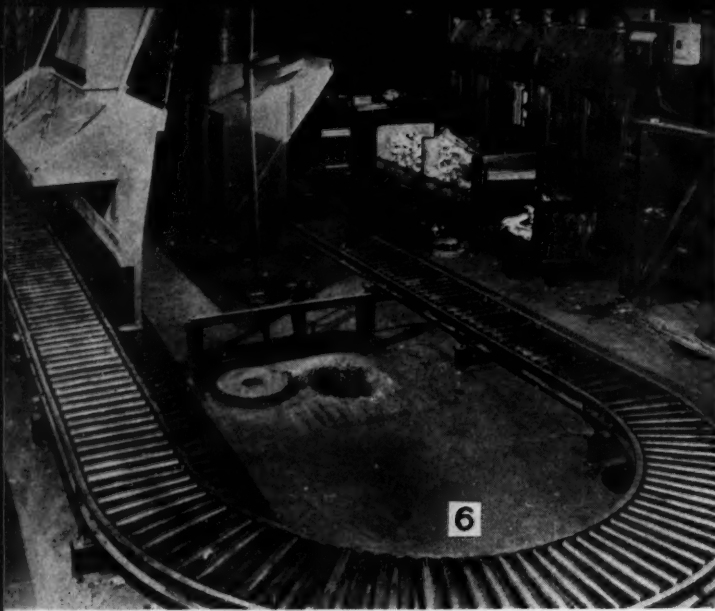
View of roller-conveyor line, showing mechanically exhausted hoods at pouring station (left) and at dump-out (right center). All exhaust air movement for the sand conditioning and handling system is provided by a central exhaust unit. The conveyor line is sufficiently long for holding molds in process and limits the lifting load of any worker to half the weight of a mold through a distance of not over three feet.
